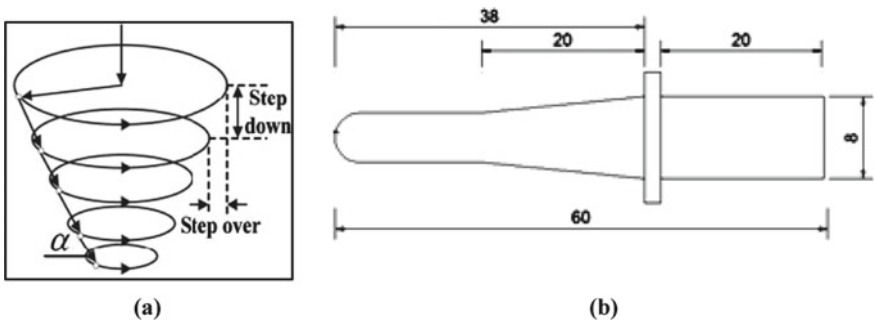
a Contour tool path, b Hemispherical end forming tool
